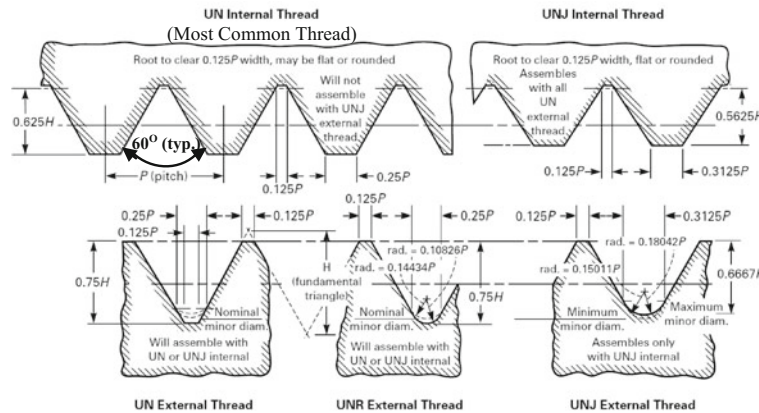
Several Thread Types. (Left) Compared to UNC (unified thread standard); *UNJ thread*: Its rounded external root ($r = 0.150-0.180$ pitch) not only greatly improves fatigue strength, but also reduces the rate of threading tool crest wear. *UNR thread*: The roots of the external threads are rounded with a radius of curvature ($r = 0.108-0.144$ pitch) improves fatigue strength. *UNF thread*: The fine threads have a slightly higher breaking load capacity due to the lesser thread depth and a larger tensile stress area for gages of the same identical material and diameter
